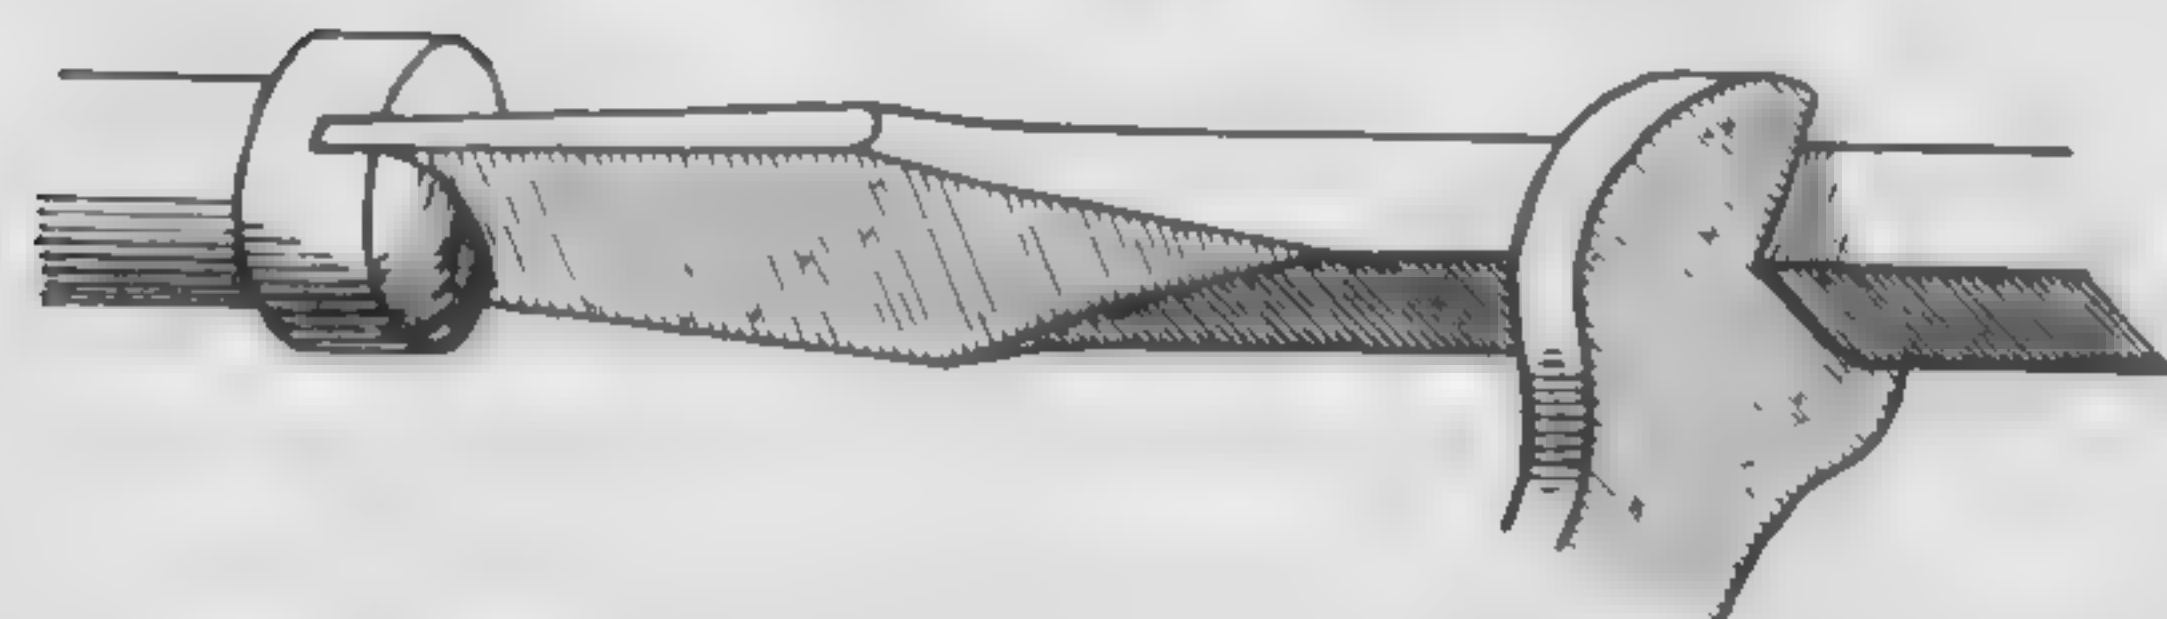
Turning a Square Shank Screw Driver with an Open End Wrench
